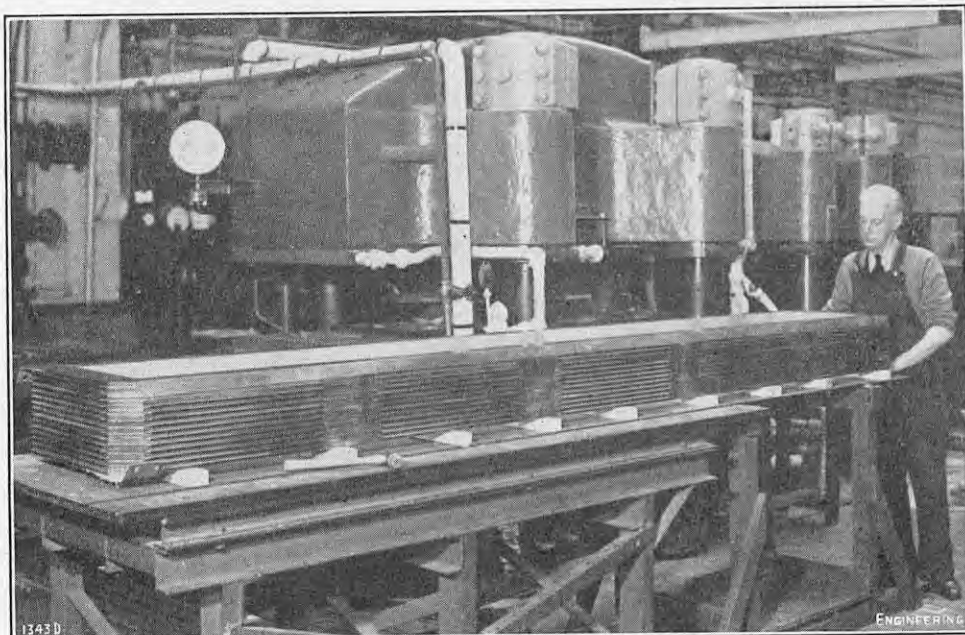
FABRICATED ROTOR COIL IN PRESS.
